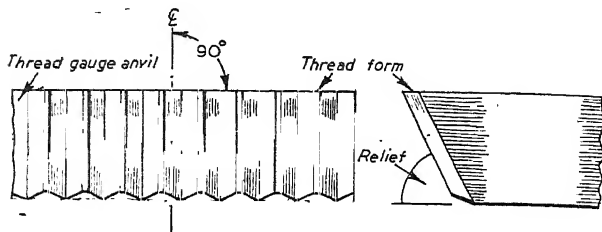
Showing the annular location of thread profile and front relief, thus allowing gauging of both right- and left-hand threads and avoiding helical errors of contact.
